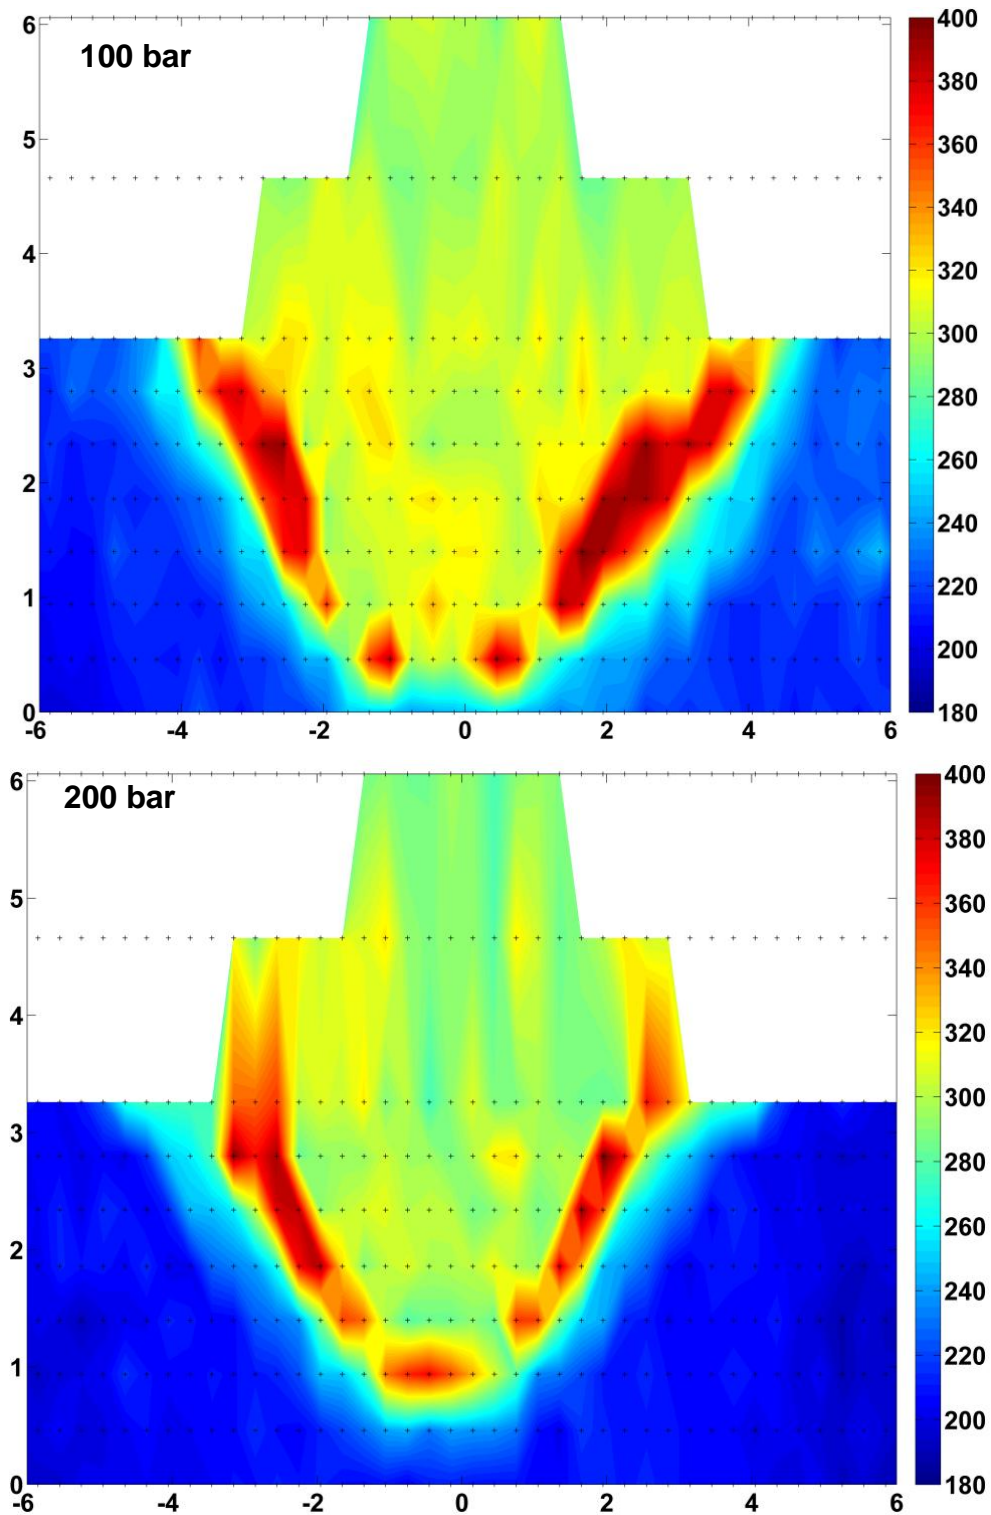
Vickers micro hardness map of the 8 m/min WFS and 7 mm/s welding speed welds for the 25 mm thick plate for 100 and 200 bar pressures. Units in mm and hardness measurement in HV_{0.5}
